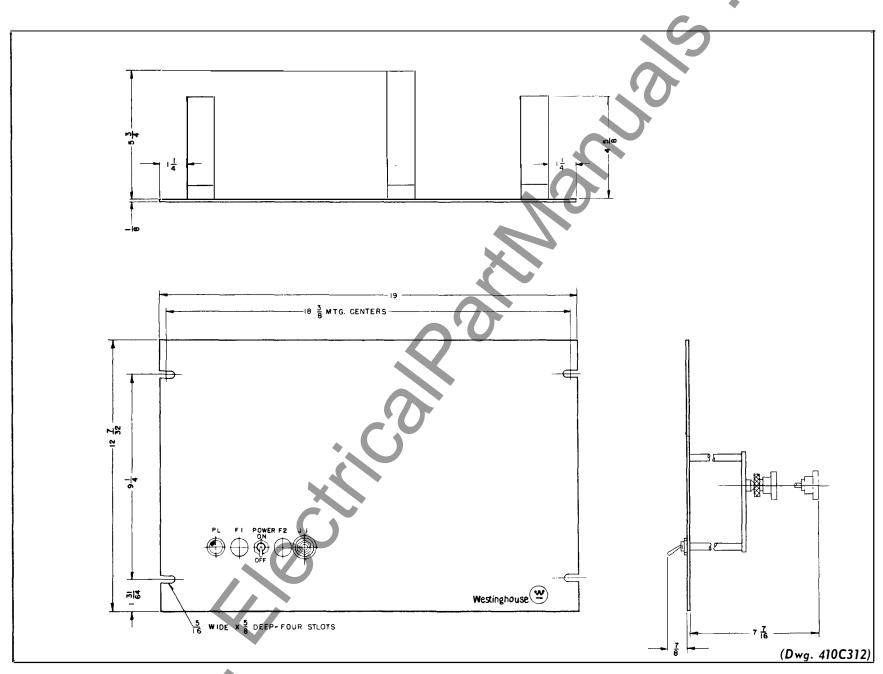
Outline and Drilling Plan for TCF Transmitter Assembly
